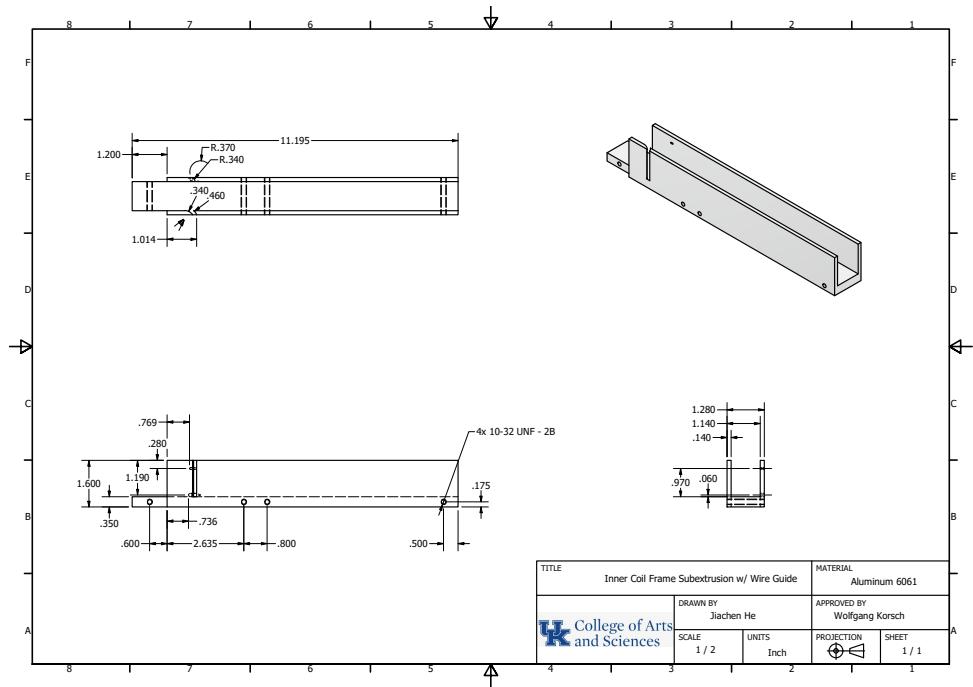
Inner Coil Frame Subextrusion with Wire Guide (Material: Aluminum 6061)
